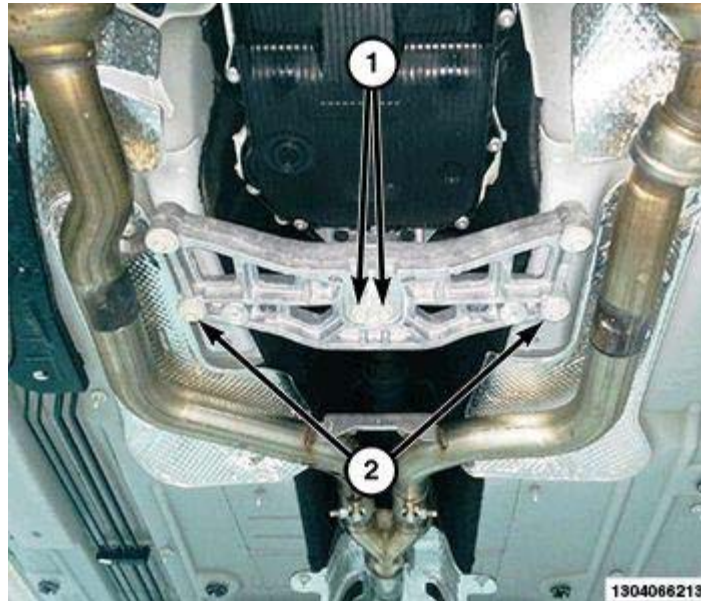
Automatic Transmission Crossmember Bolts & Fasteners
